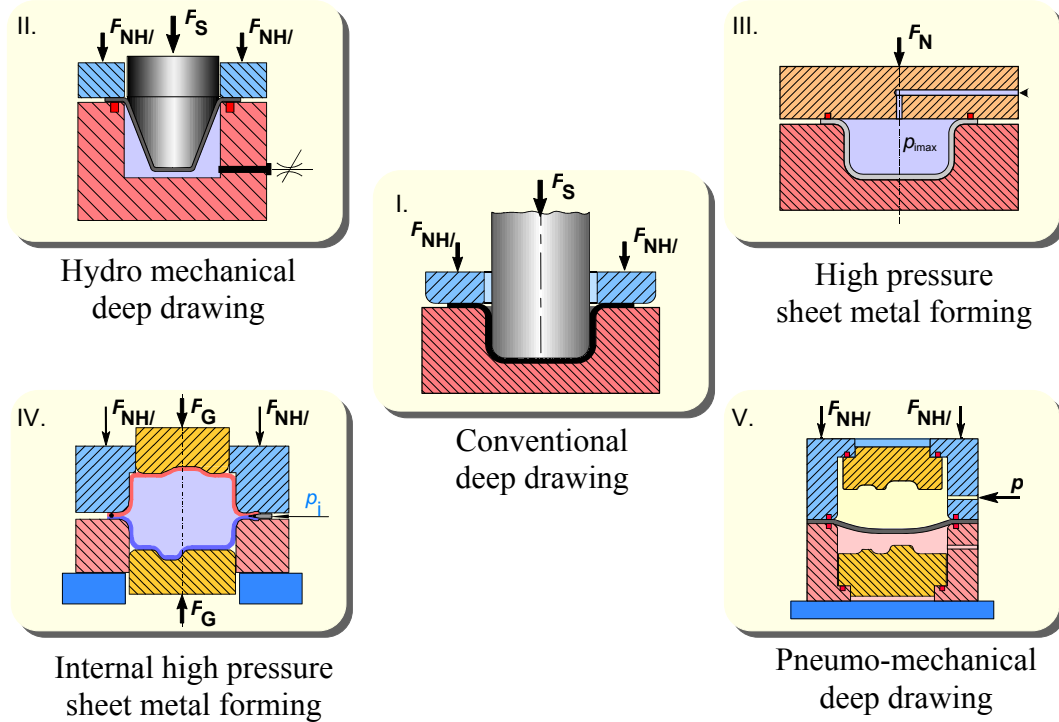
Current deep drawing technologies implemented in sheet metal forming industry [3]
